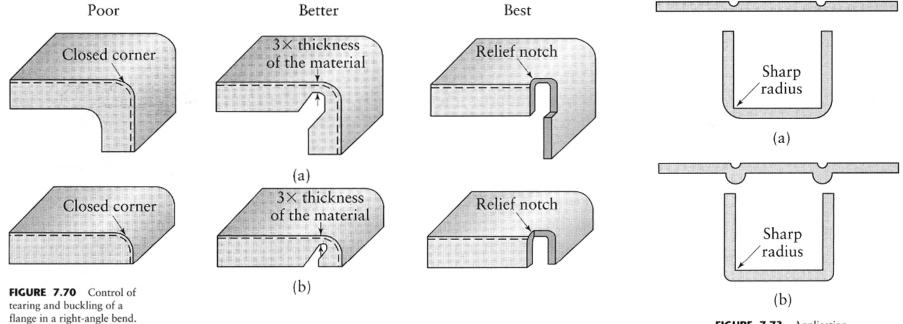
Application of (a) scoring or (b) embossing to obtain a sharp inner radius in bending. However, unless properly designed, these features can lead to fracture. *Source*: Society of Manufacturing Engineers.
